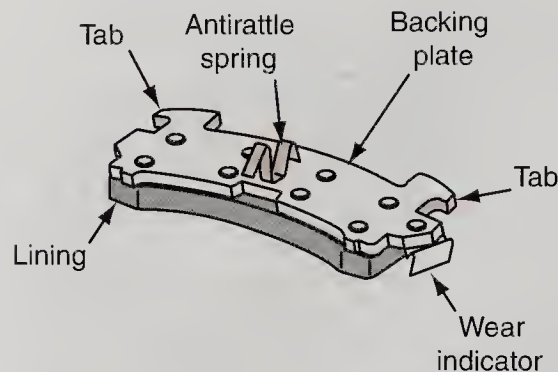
Tabs on the metal backing plate locate the pad in the caliper.
